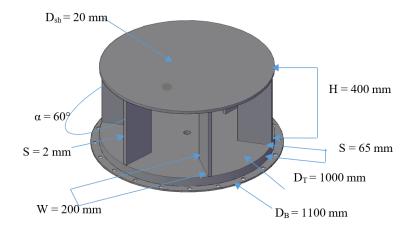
Flat plate guiding wall (FPGW) dimensions
